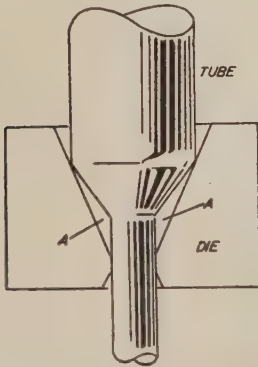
ENTRAPMENT OF LUBRICANT BETWEEN TUBE AND DIE
